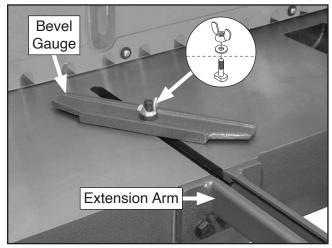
Bevel gauge installed to support angled front workpiece edge.
